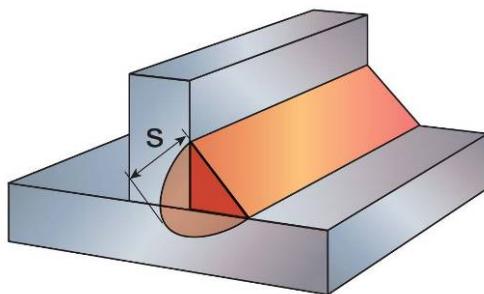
Asymmetrical fillet weld.
